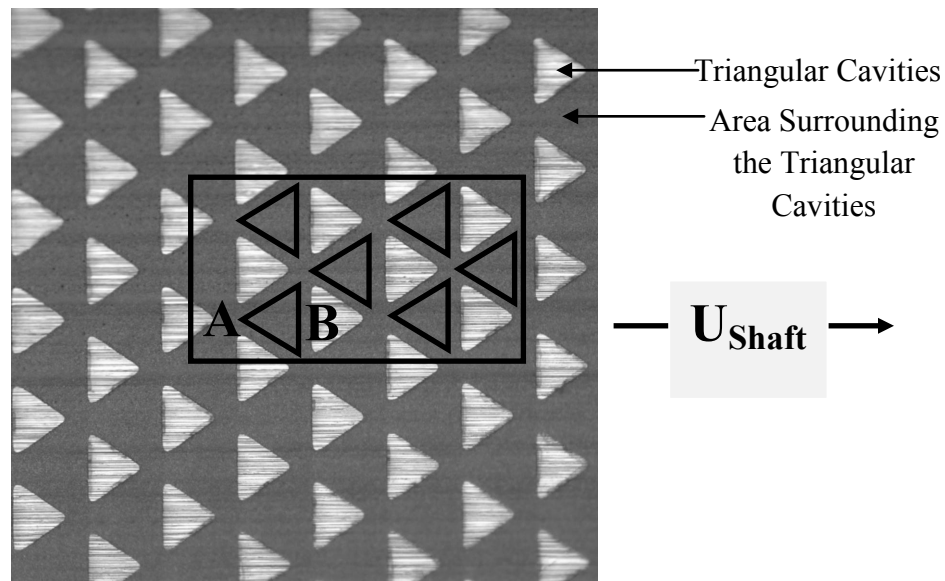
Shaft Surface Manufactured with Triangular Cavities Leading
